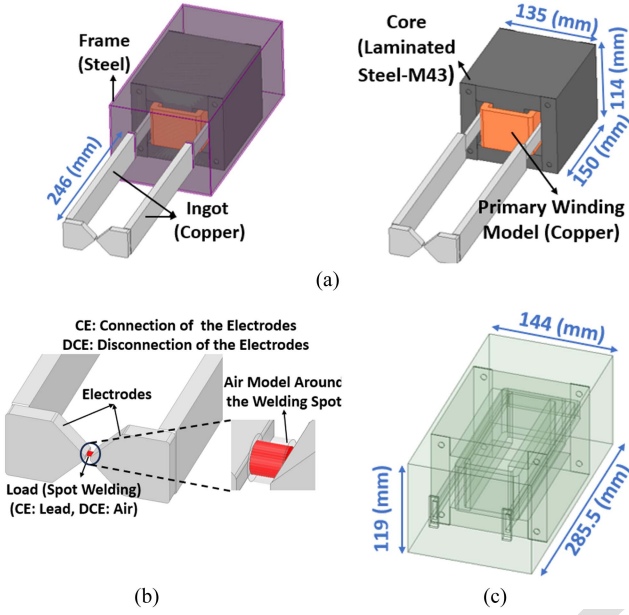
RSW transformer model: (a) transformer components; (b) welding spot load; and (c) resin mold of the transformer.
